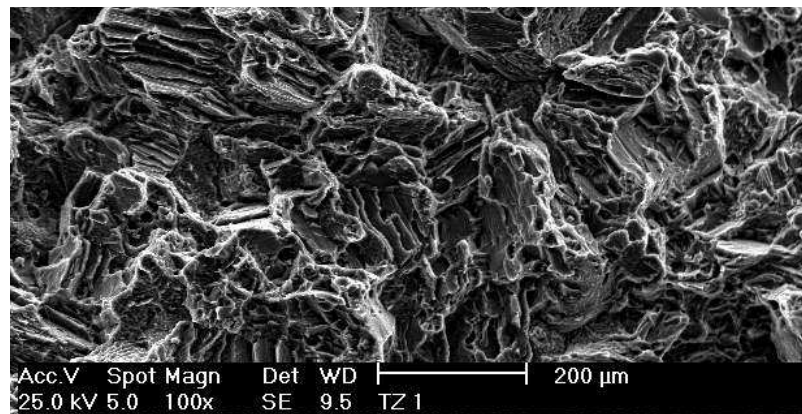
The fracture surface of impact test sample of alloy B
